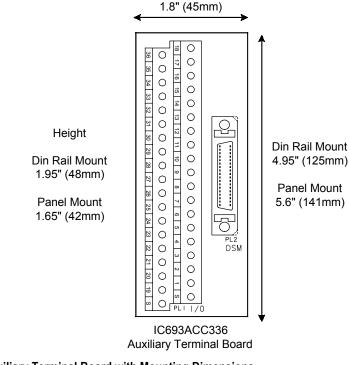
Auxiliary Terminal Board with Mounting Dimensions
